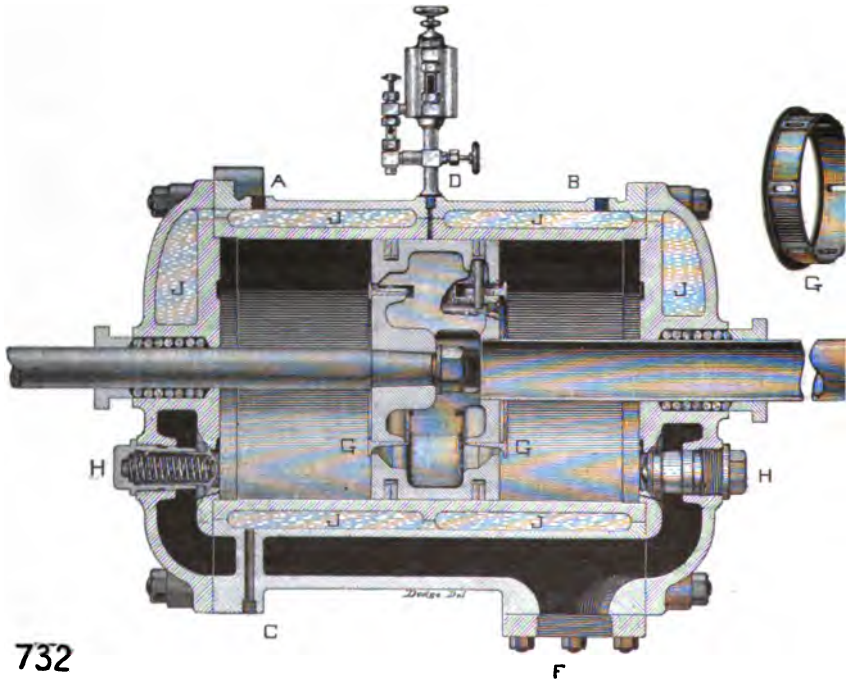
DETAILS OF AIR CYLINDER, SHOWING PISTON INLET VALVE.
